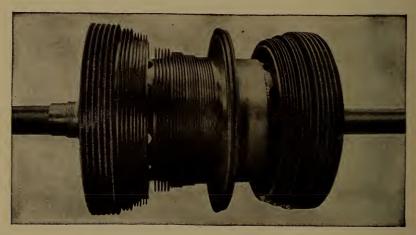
Rotor of Semi-Double-Flow Steam Turbine Courtesy of Westinghouse Machine Company, East Pittsburgh, Pennsylvania
